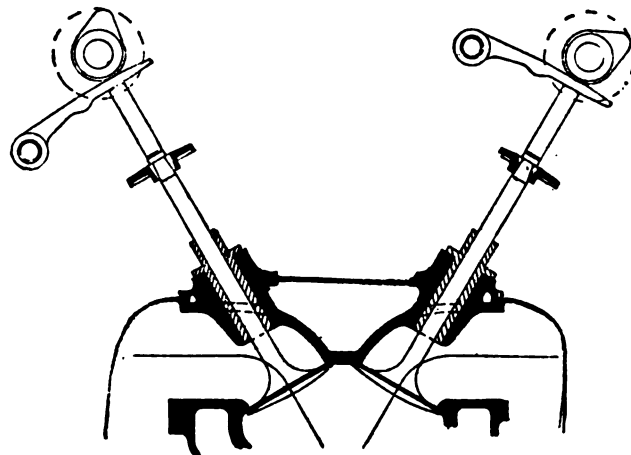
Valve Gear of the 1914 Sunbeam Engine
